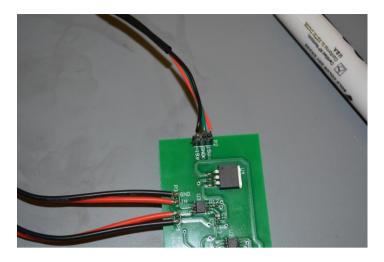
Correct Attachment of Power Supply Wiring to PCB
